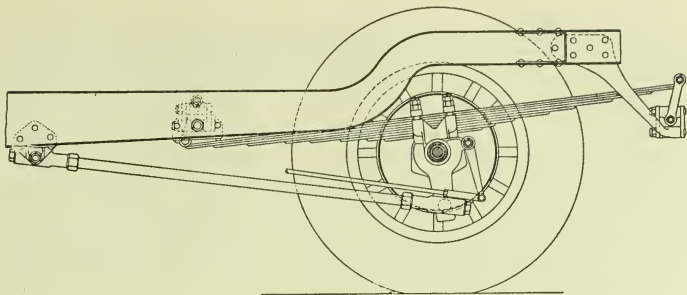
SCHEMATIC DRAWING OF A RECENTLY DEVELOPED SPRING-SUSPENSION
